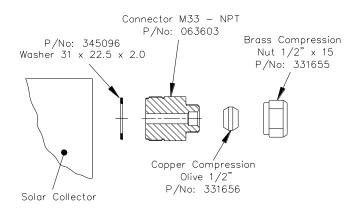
DETAIL B – END PLUG ASSEMBLY – SCREWED FITTING
